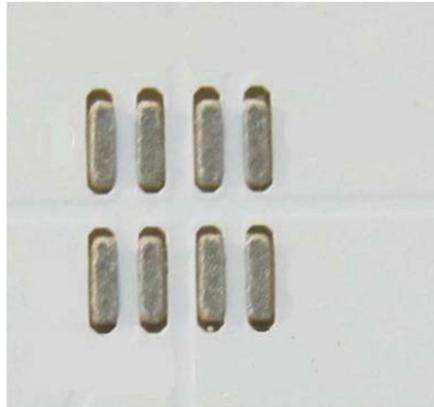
An example of good stencil printing on 4-up MCPCB star board.
